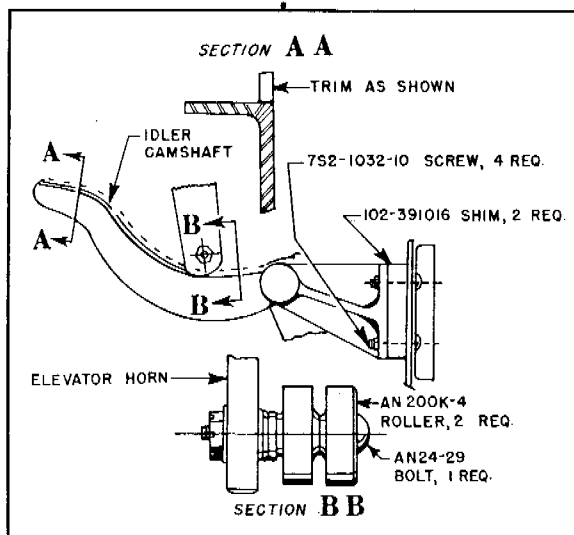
View Showing Roller Added and Flange To Be Removed From Idler Camshaft
